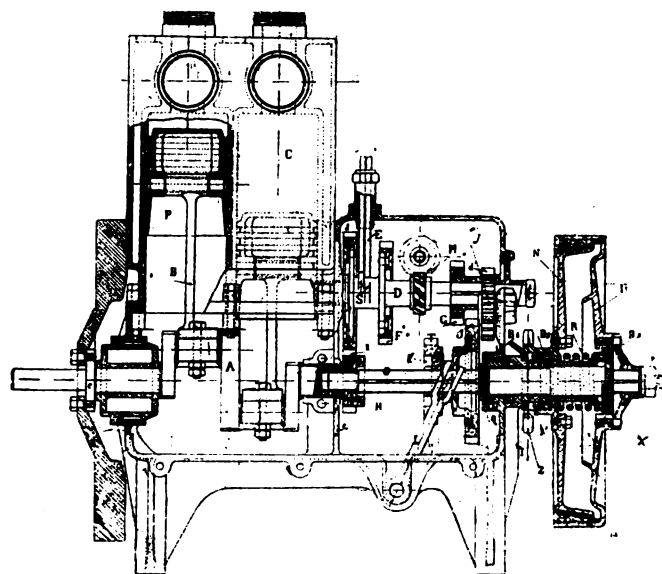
SECTION OF "MOTOBLOC" 10-H.P. TWO-CYLINDER MOTOR AND CHANGE-SPEED GEAR.
